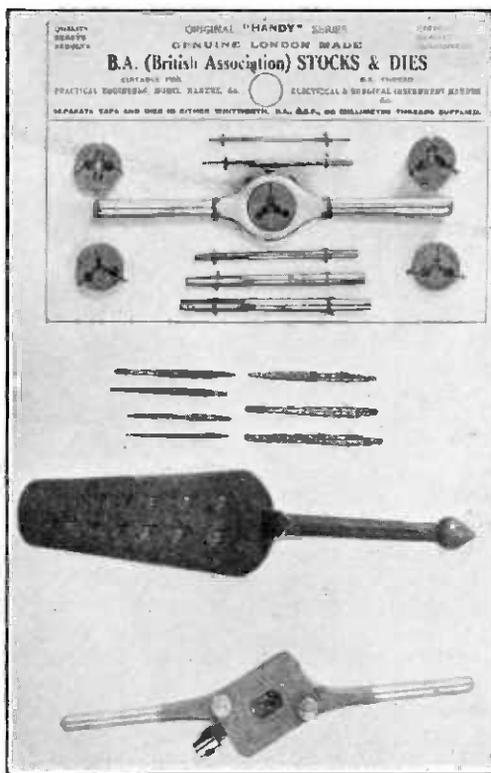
Circular stocks and dies, screw plate and taps, and adjustable screw plate.
